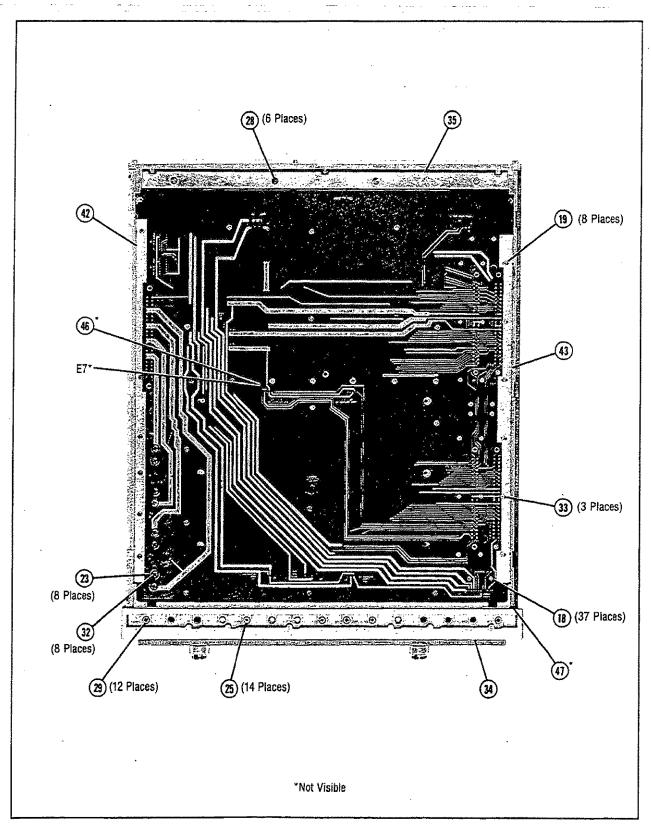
HP 8513A Miscellaneous Mechanical, Chassis, and Electrical Parts (3 of 5)
